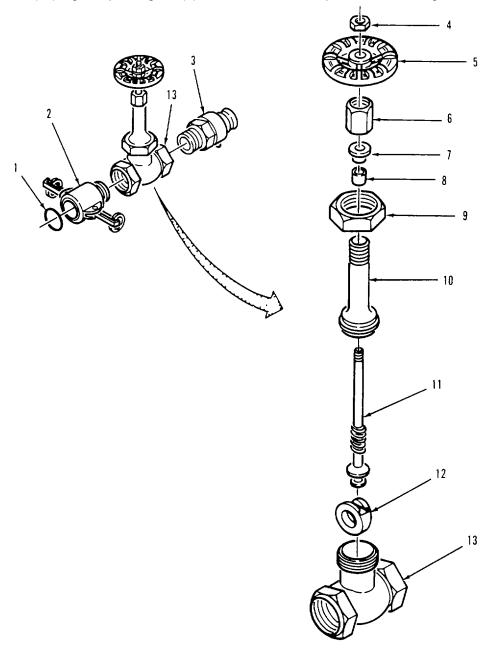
Gate Valve Assembly (2-inch) Assembly
